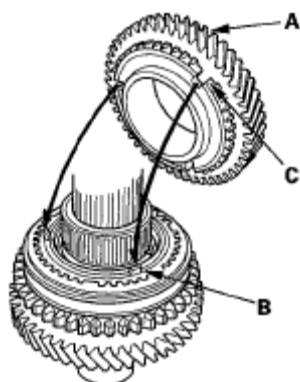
Identifying 2nd Gear, Synchro Cone Fingers And Grooves
